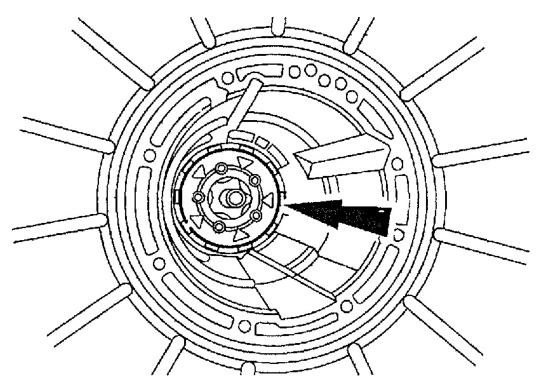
Removing Low/Reverse Planetary Carrier Thrust Bearing
